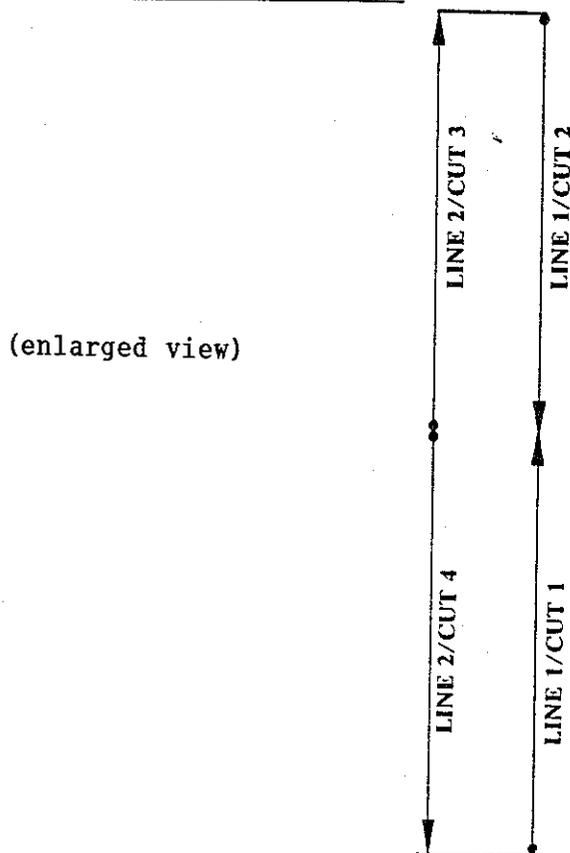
KNIFE ASSEMBLY CALIBRATION TEST PATTERN 2 :
